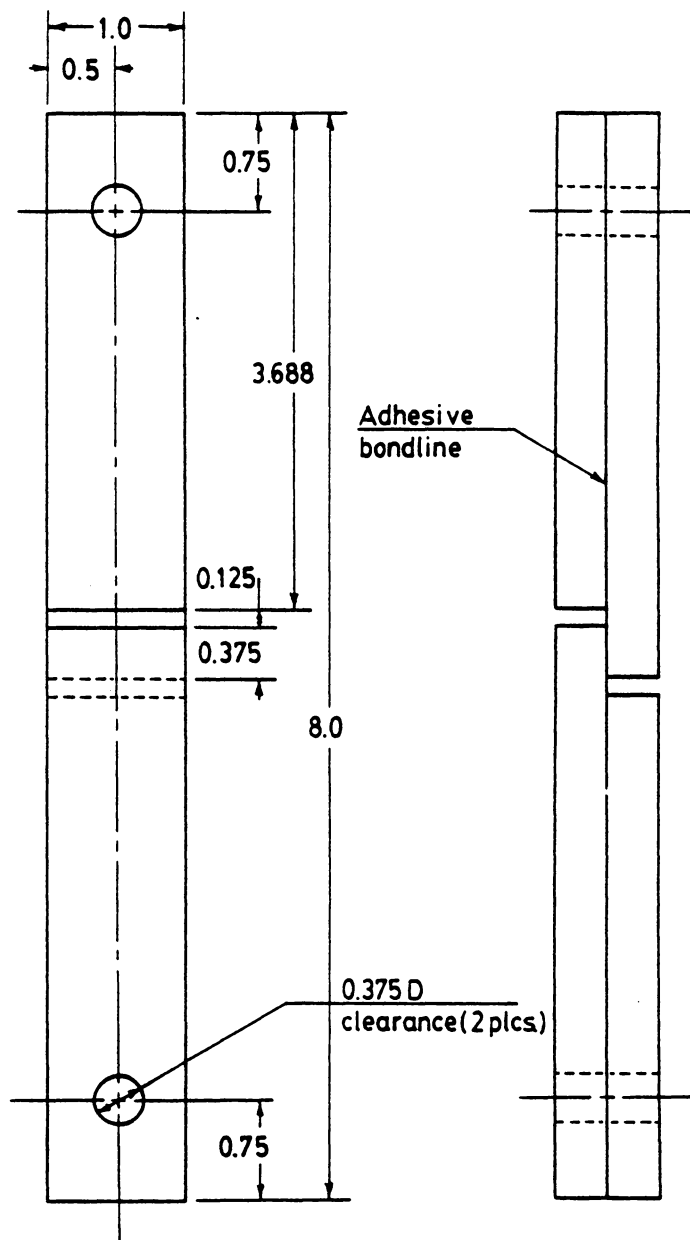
Dimensions of the thick adherend lap joint specimens: joints machined from bonded plates.
